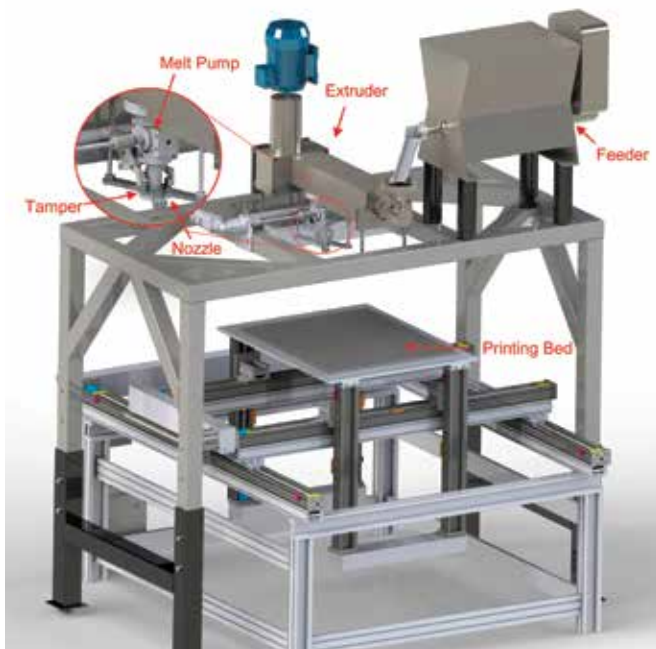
A SOLIDWORKS rendering of Purdue's CAMRI 3D printer, showing the feedstock hopper, extrusion and heating mechanisms, and print bed.
